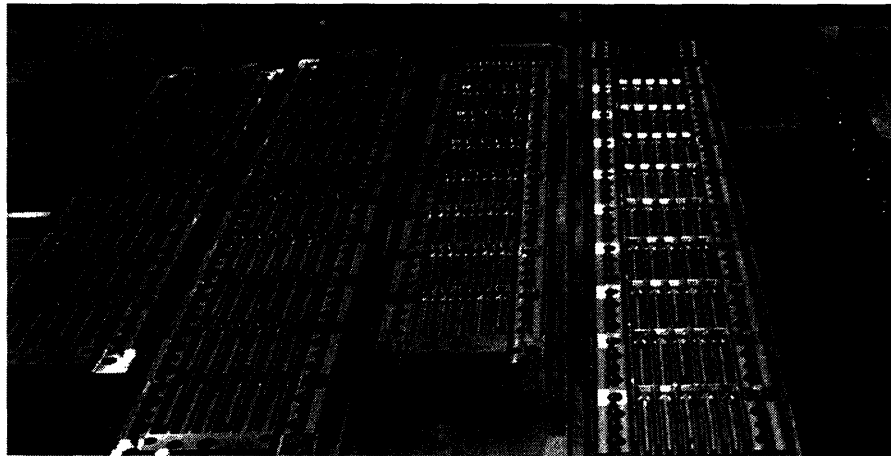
Inserts for a sheet metal stamping (fin) die.
